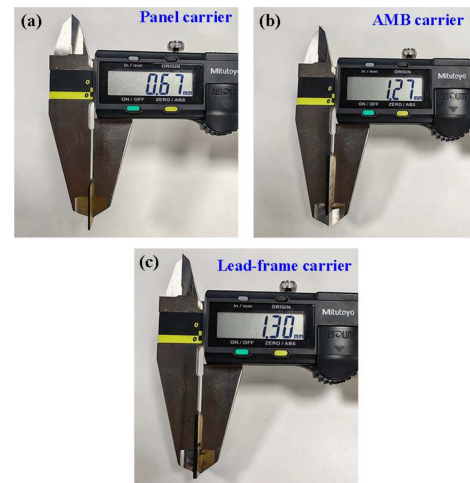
Thickness of PCB embedded packaging cells: (a) panel carrier and (b) AMB carrier, and (c) lead-frame carrier.
